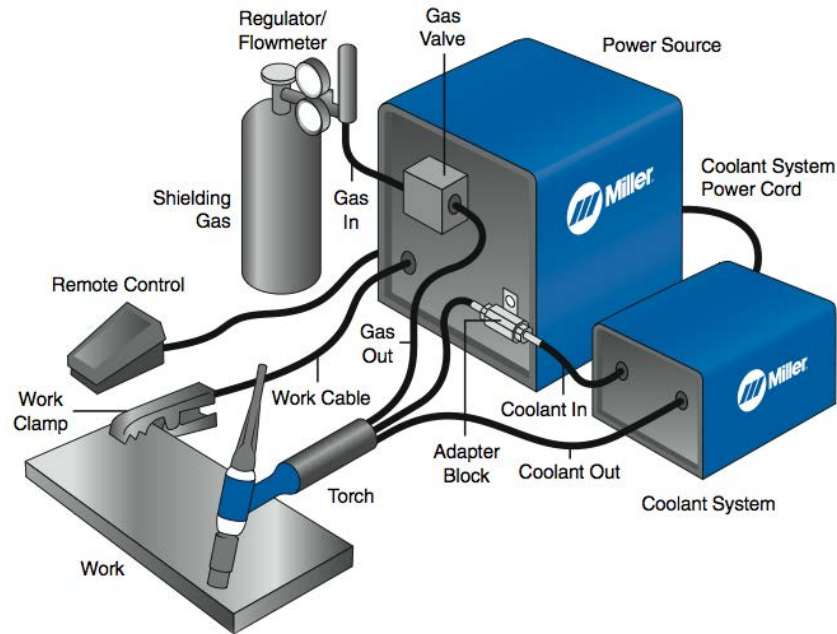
Equipment for manual GTA welding [1]
